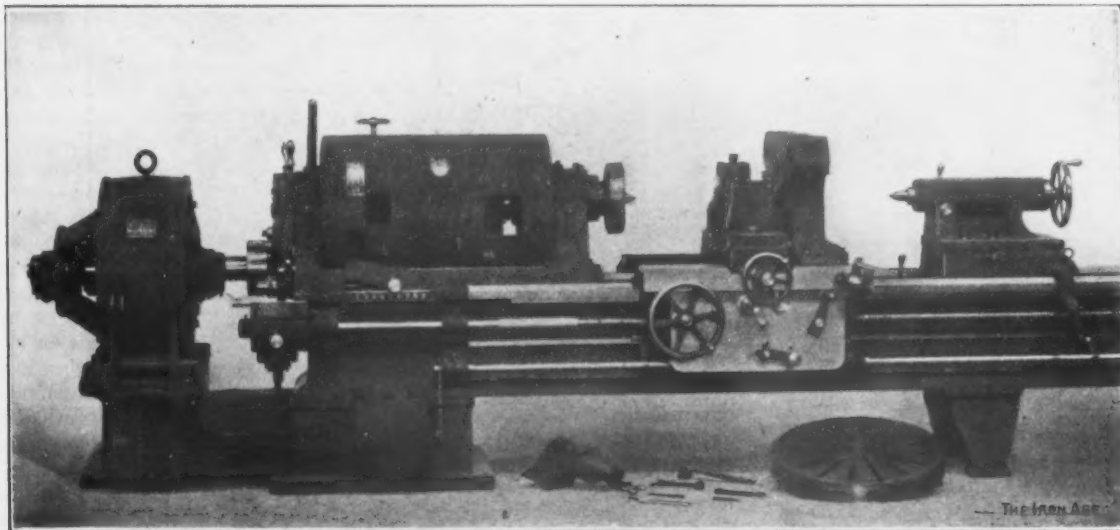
A 27-In. Patent Head Lodge & Shipley Lathe with a 10-Hp. Westinghouse Motor.
